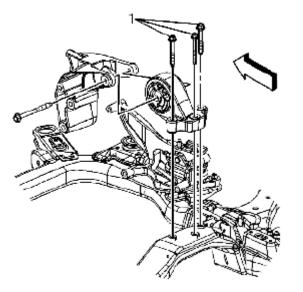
Identifying Engine Mount Bracket And Bolts Courtesy of SUZUKI OF AMERICA CORP.
